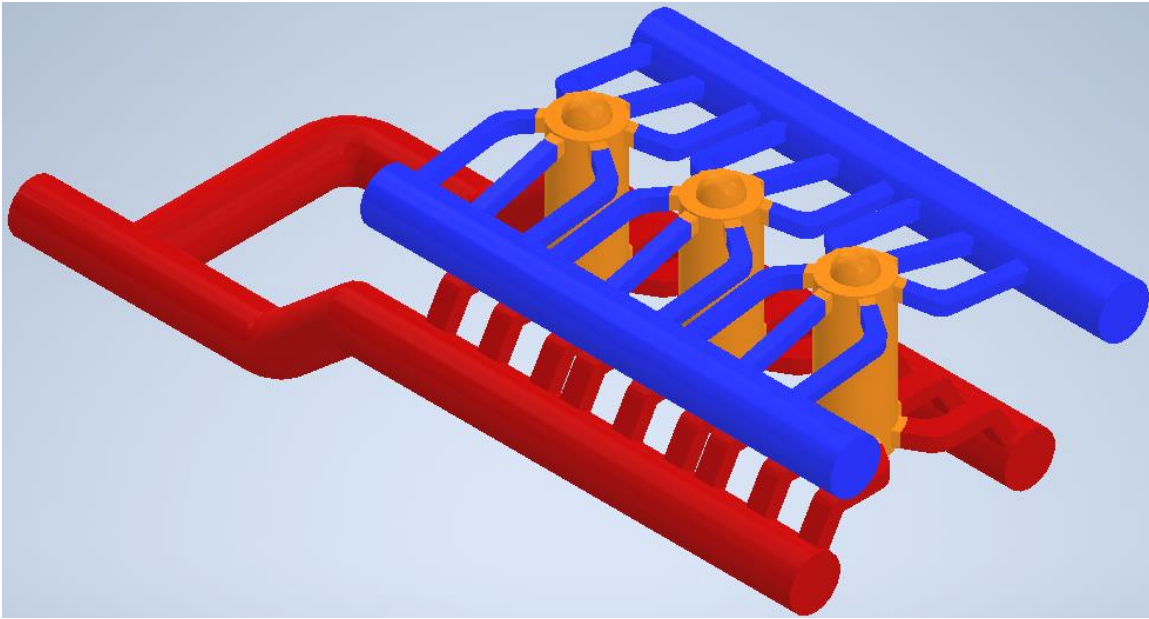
CAD model for the tumble design of the opposed piston engine
